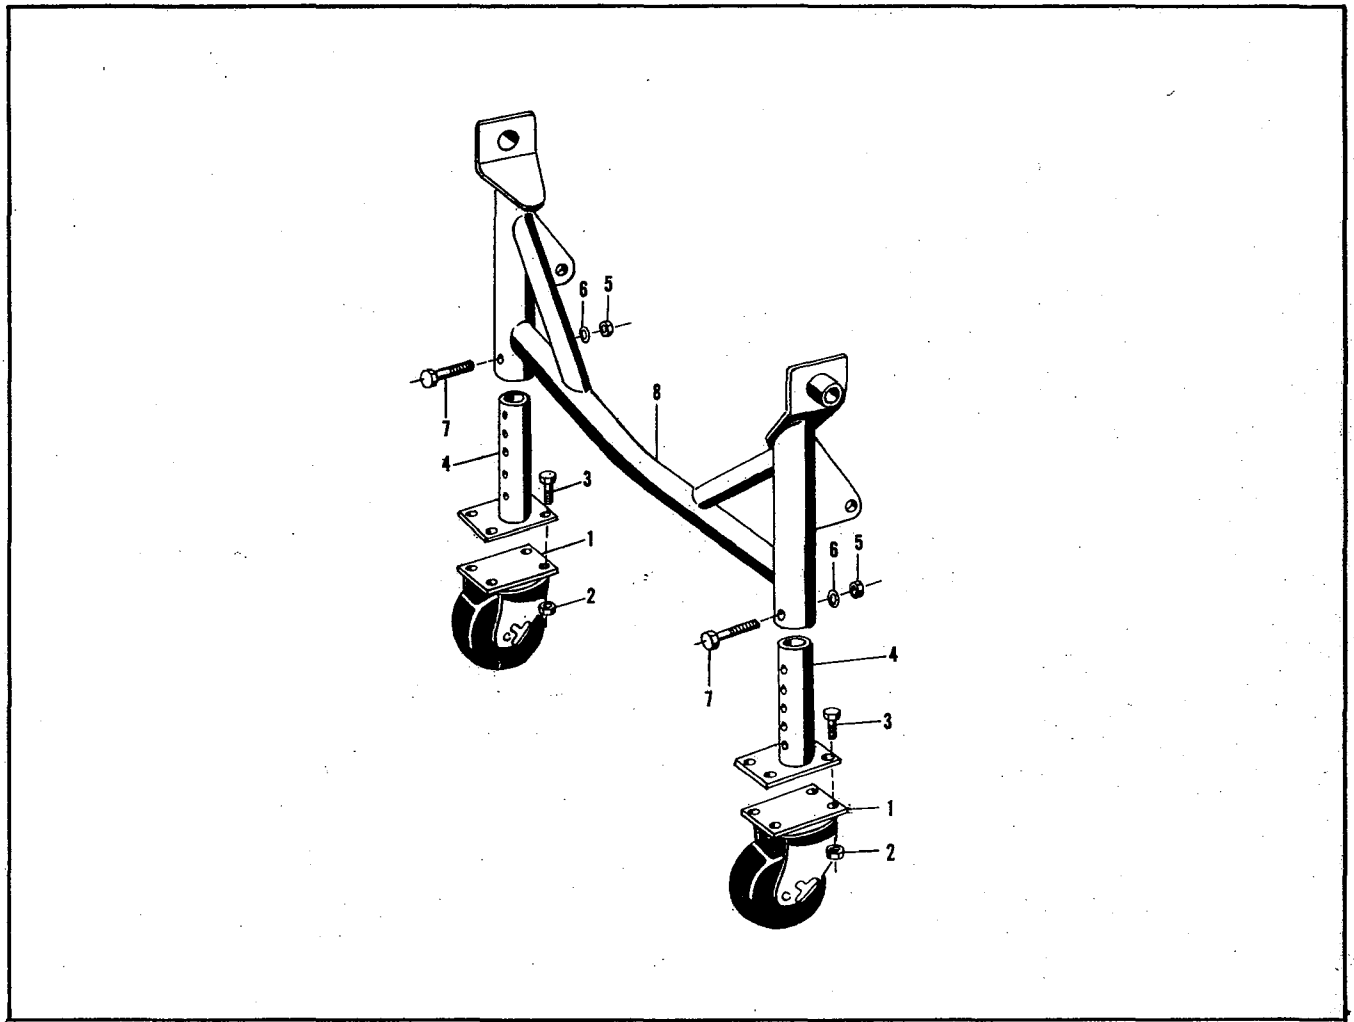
Engine Repair Stand Leg Assembly, Part No. 104288
